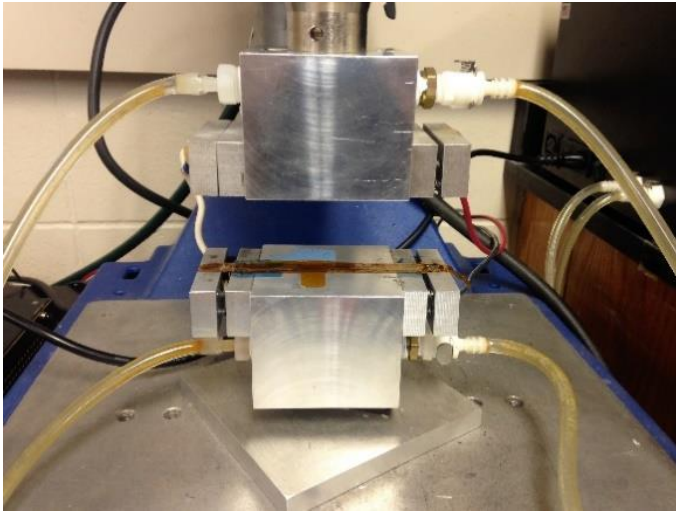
Impulse welder with heated elements on top and bottom fixtures.
